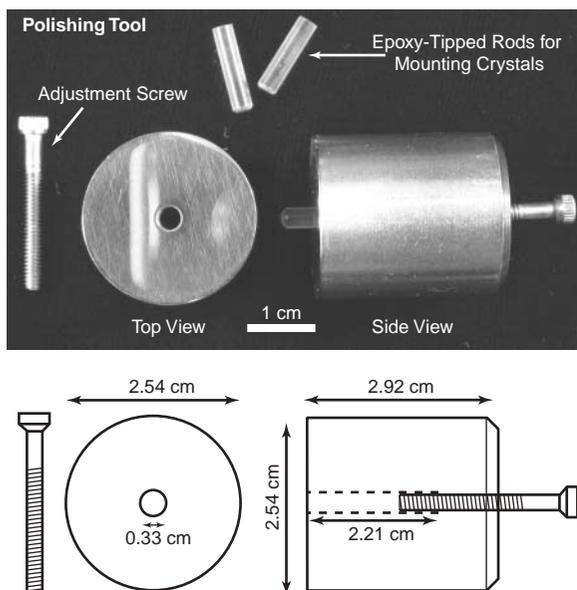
Photograph (top) and line drawing (bottom) of the polishing tool, adjusting screw and epoxy tipped rods for mounting crystals. In the photograph, the body, adjustment screw and two sample rods are shown to the left, whereas the assembled polishing tool with a rod and the adjustment screw inserted is shown to the right.
